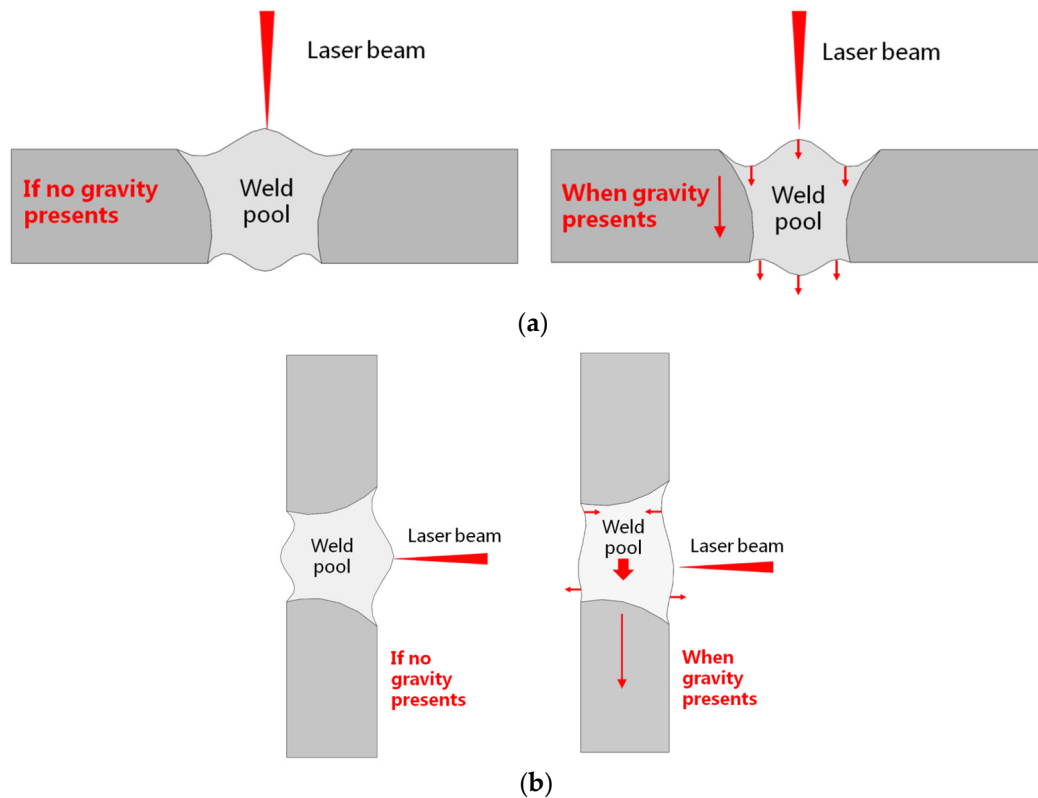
Schematic representation of the molten metal flow and movement of the weld pool surface due to the action of gravity in (a) the flat position and (b) the horizontal position.
